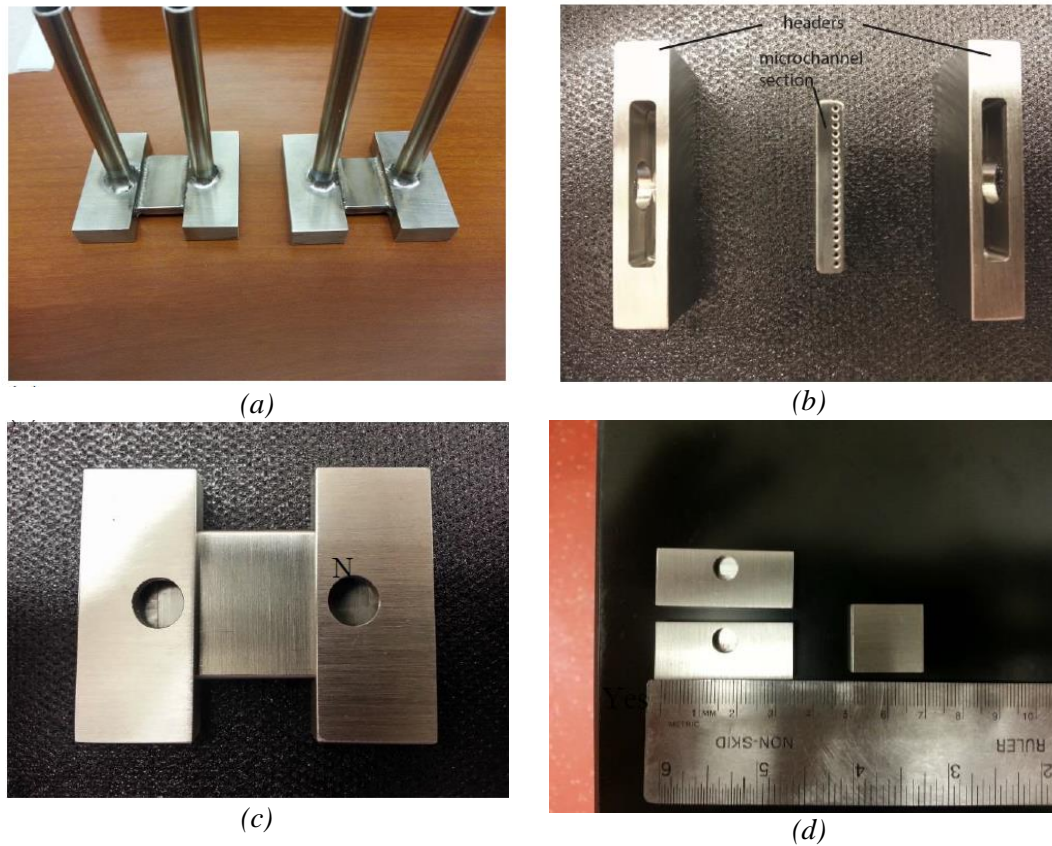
Pictures of the LSR 1, (a) welded microchannel receivers, (b) side view of the microchannel section and plena, (c) assembled view of the plena and microchannel sections prior to welding, and (d) reference scale for the sections
